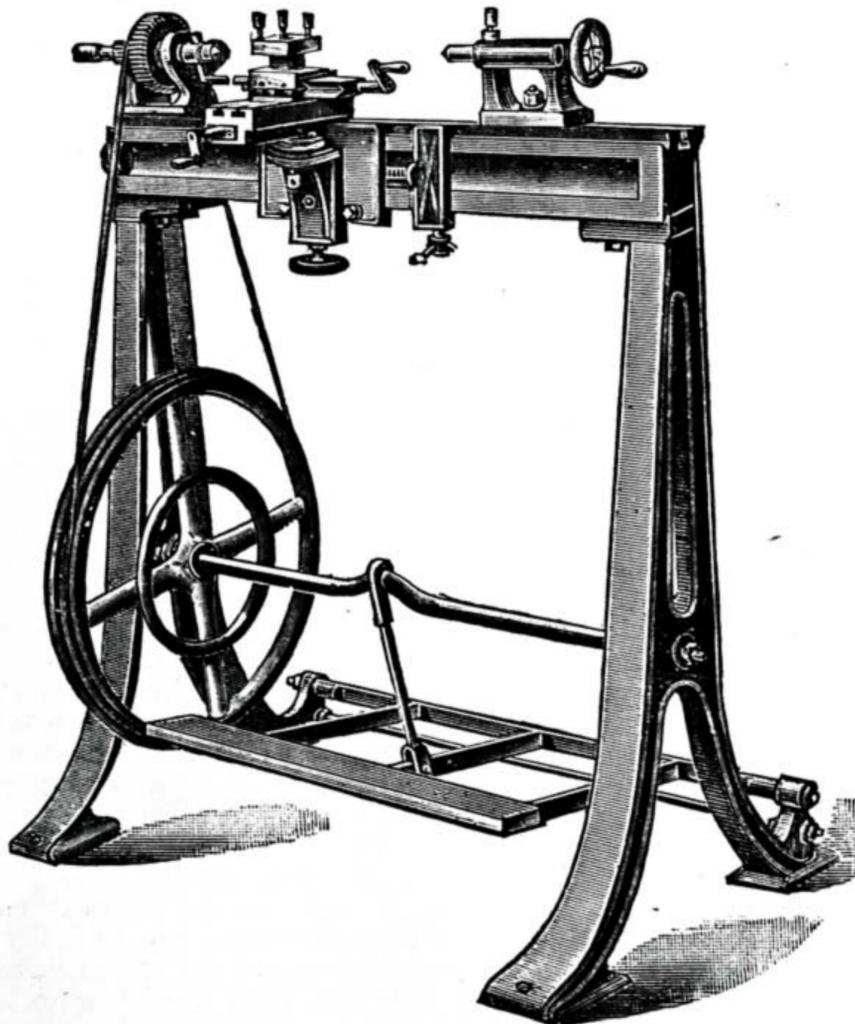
Price's "Universal" Lathe, with Front Slide and Canting Head.
